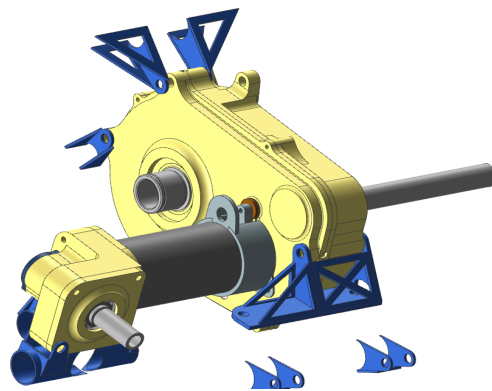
The gearbox consists of a single-speed, double reduction gear set that can split power to a transfer case.
